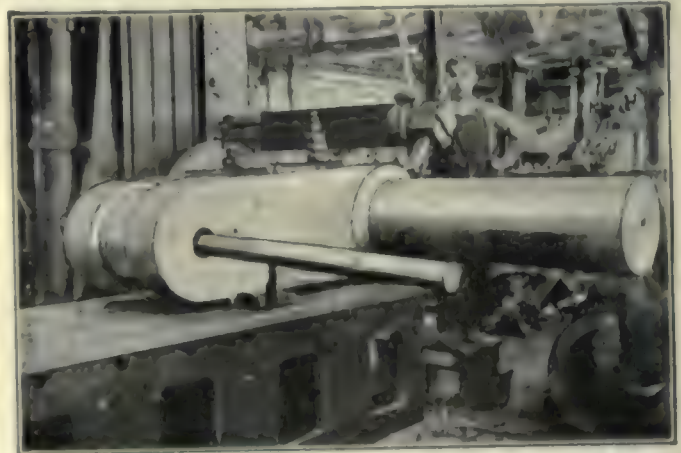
SHAPING ENDS OF YOKE ON CRANKSHAFT
